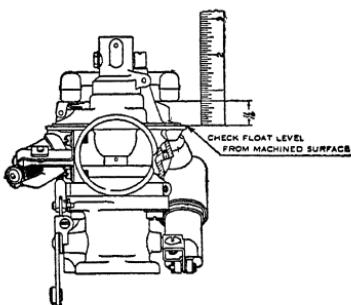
Checking and Adjusting Chrysler-Plymouth Float Level
